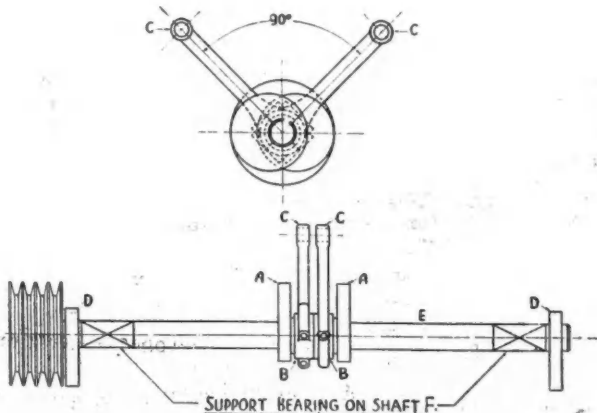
Diagram of bearing testing machine in use at the General Motors Research laboratory showing the shaft, pedestal bearings, and connecting rods.
